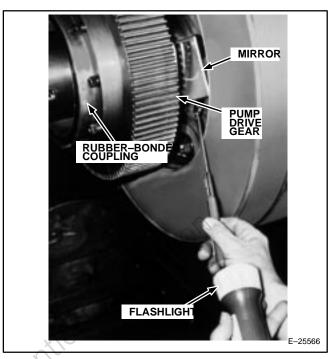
Checking Pump Drive Gear Match–Mark Numbers.
